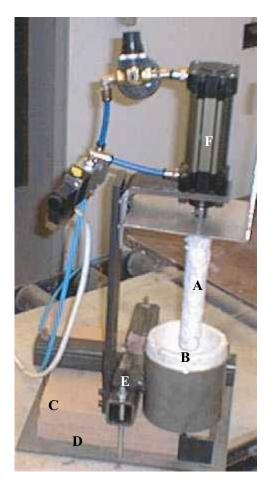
Main components of the new equipment: stopper rod (A); pouring cup (B); cope (C); drag (D); metallic clamps (E); pneumatic cylinder (F).
